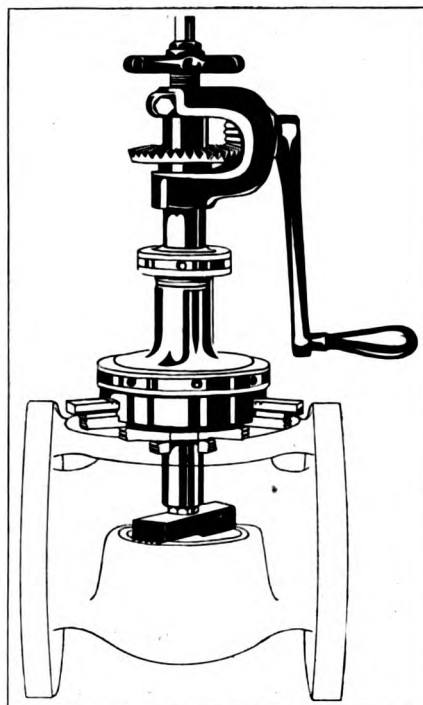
RESEATING MACHINE FOR GLOBE VALVE READY TO OPERATE
